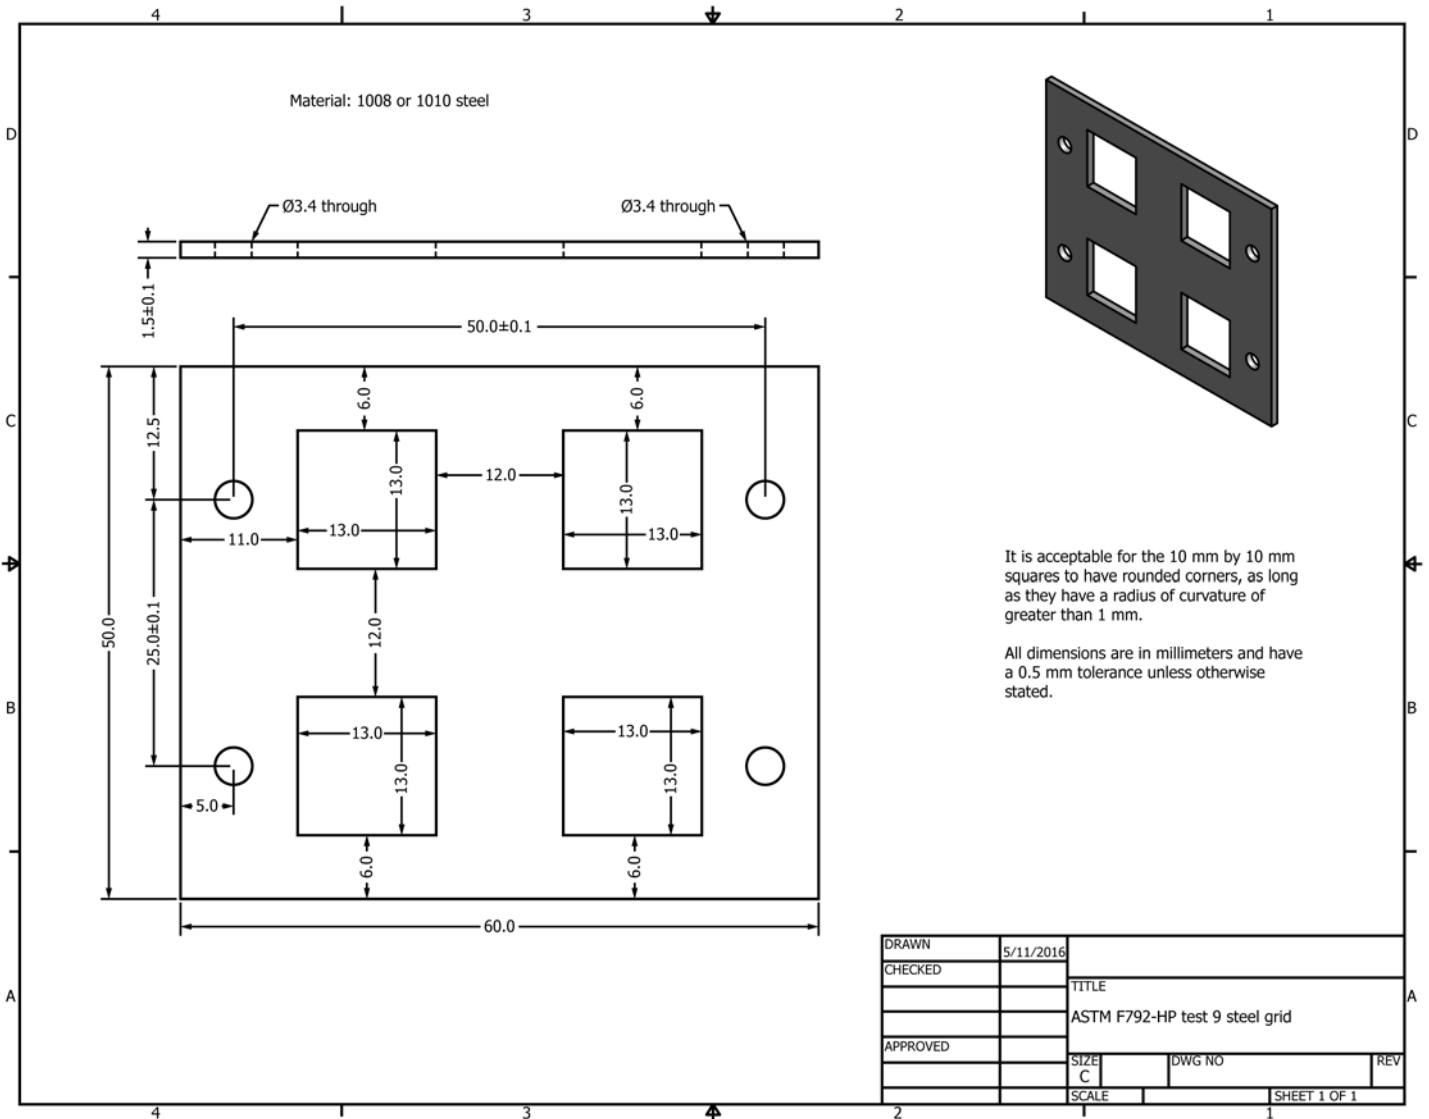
Practice F792 – HP Mechanical Drawing
